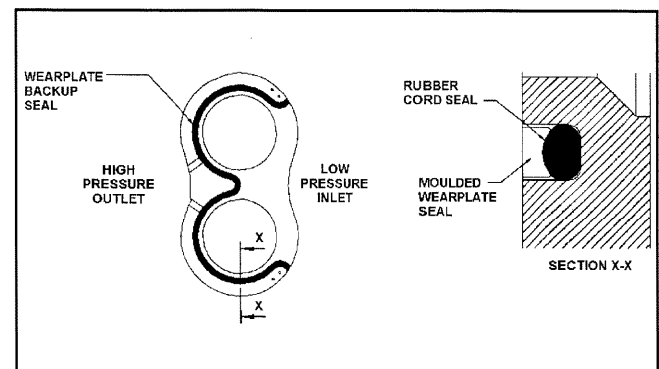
Moulded Backup with Rubber Cord Seal Type Wearplate
